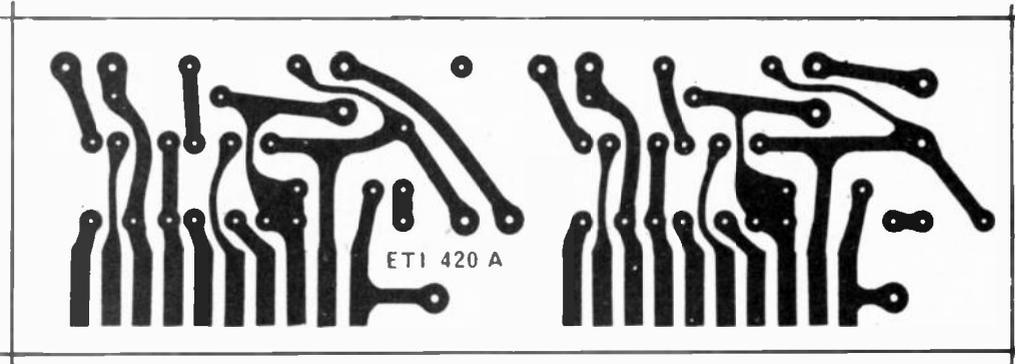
Printed circuit board for the twin power amplifier assembly.
